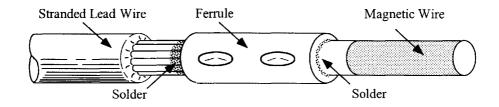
Ferrule Connection Using Stranded and Magnetic Wire.
